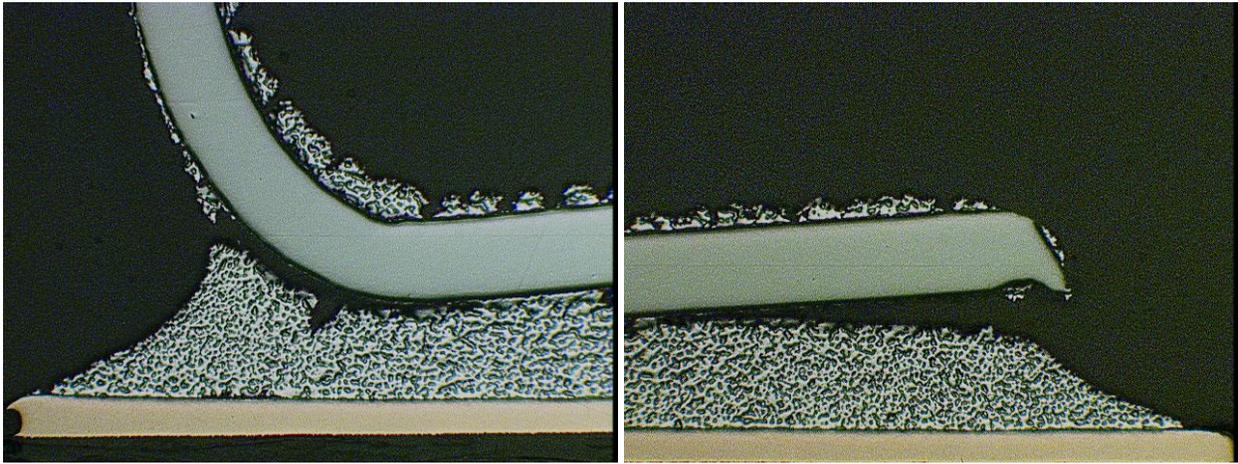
a/b, Solder Joint (a) Heel & (b) Toe, Hybrid Component U33, Sn63/Pb37 Test Vehicle 307
